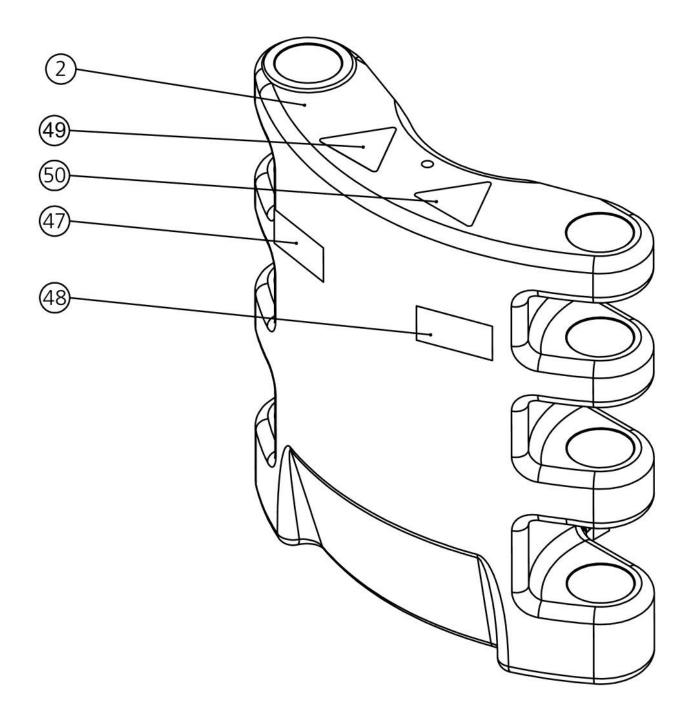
Principle drawing of a FMS-500-AIR part 2
